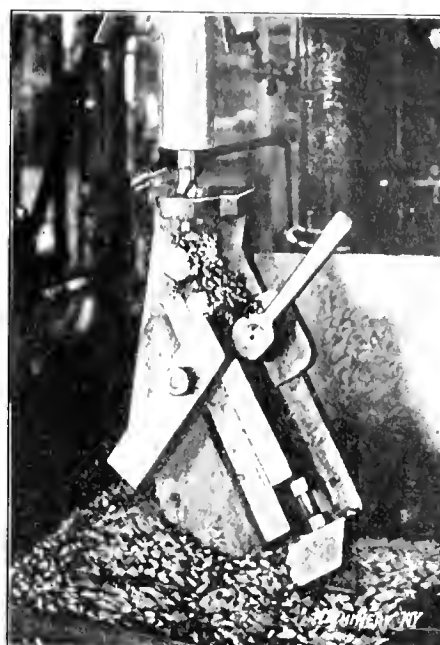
Simple Form of Chuck for Drilling the Cutter Hole in Off-set Tool-holders
